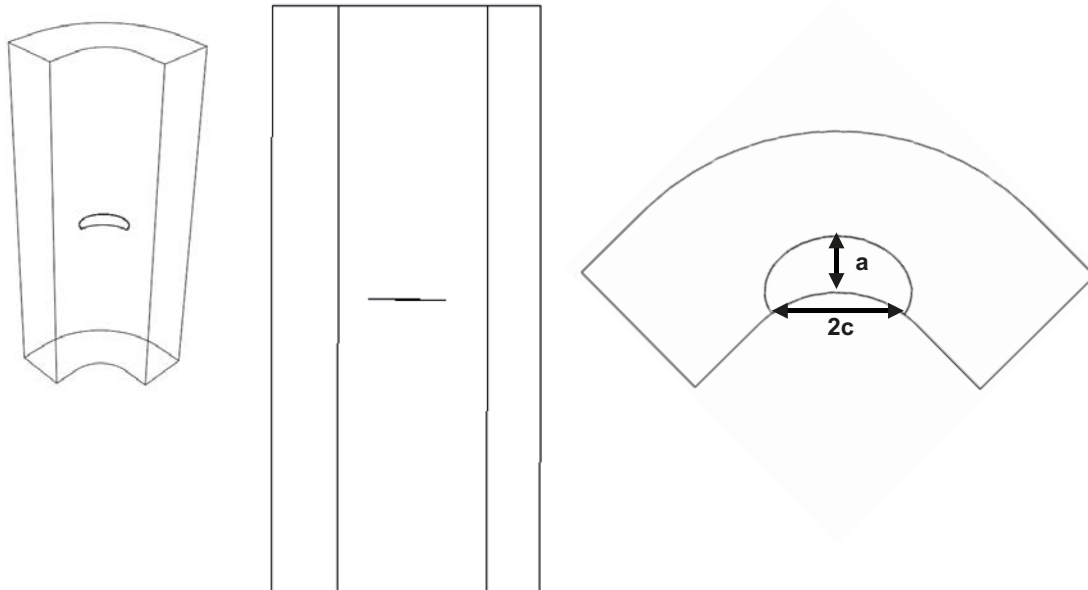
Schematic of the geometry of the channel-tube corner crack.
